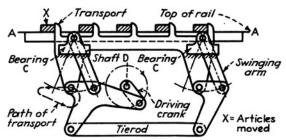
This is another form of transport mechanism wherein a link motion is used. The bearings C are supported by the frame, as is the driving shaft D.
